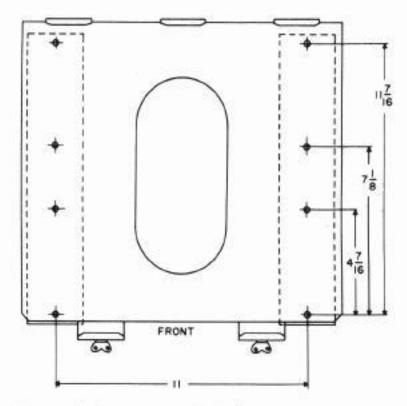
Case CY-6063/UG Shock-Mounted Installation Mounting Holes Location
